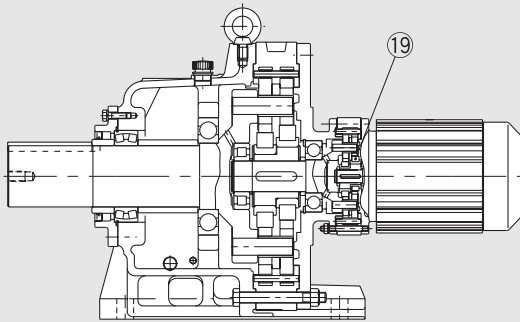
Type CHHM (Horizontal Gearmotor)
